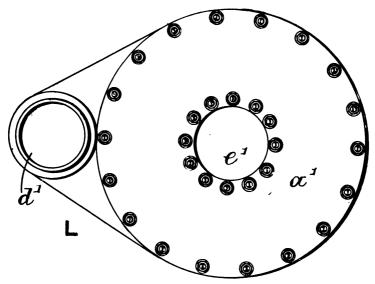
Thornycroft steam omnibus. Plan view of boiler.
